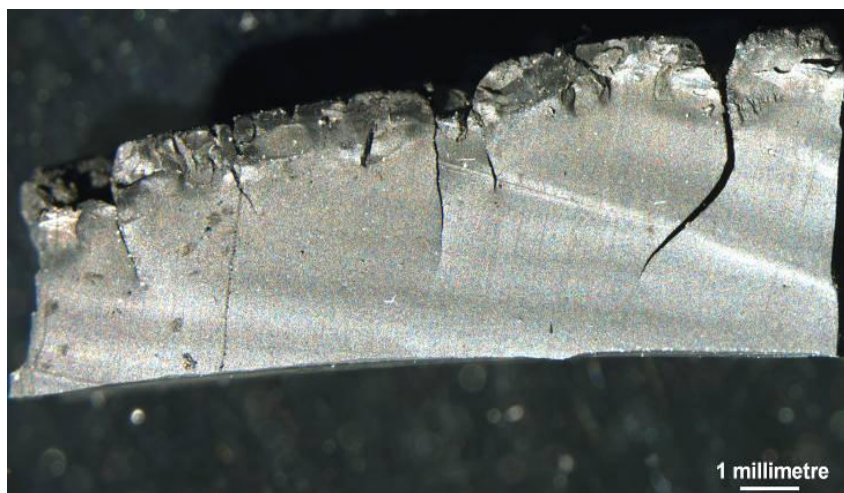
Section cut through rubber showing the hard layer (~0.5mm thick) and cracks into the transition layer (~4mm deep).
